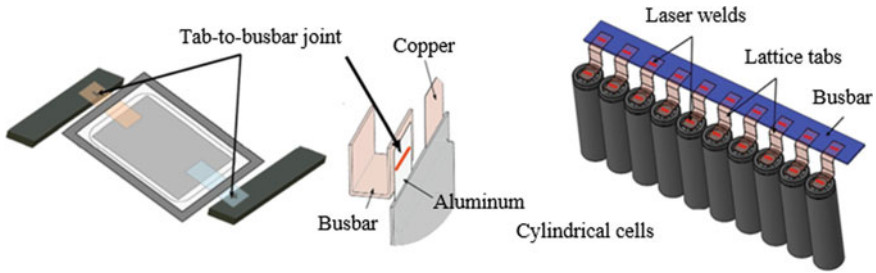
Example of tab-to-busbar welding for pouch and cylindrical cells [55]
